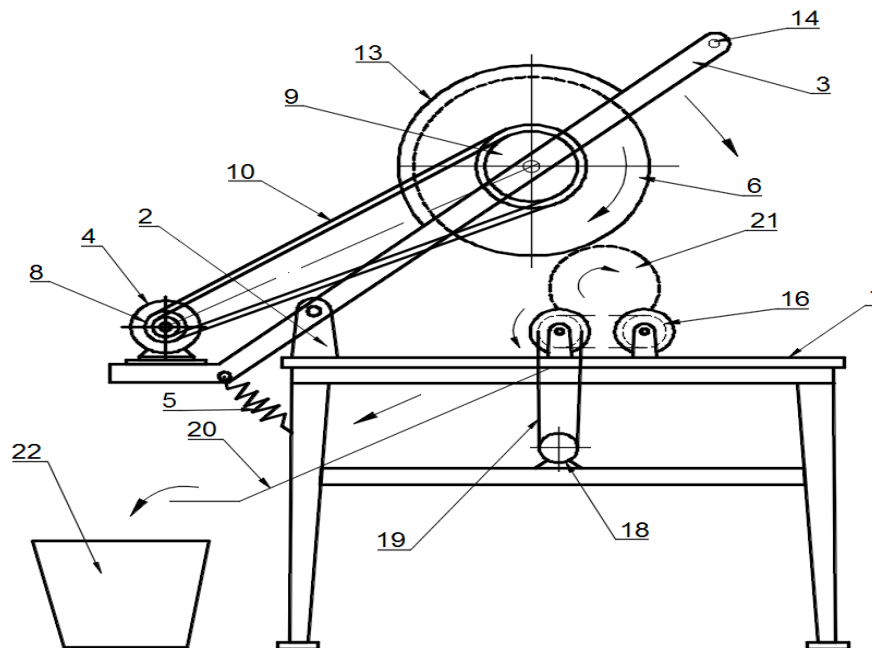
A general view of the machine for cutting in melon annular segments (end view)
